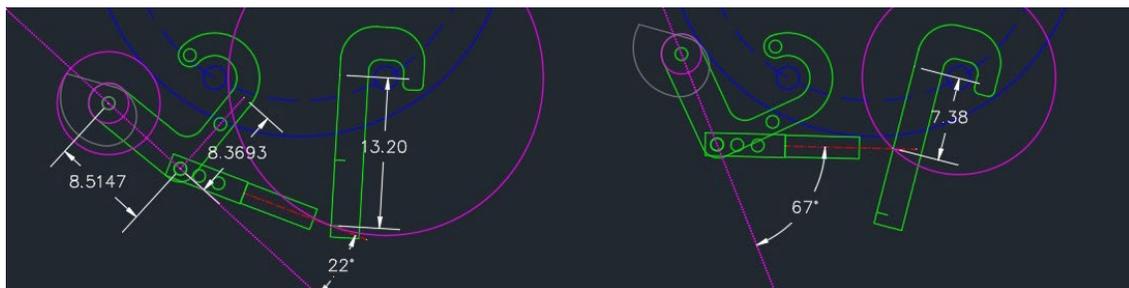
CADD model of Millerbernd wrench geometry and operations
